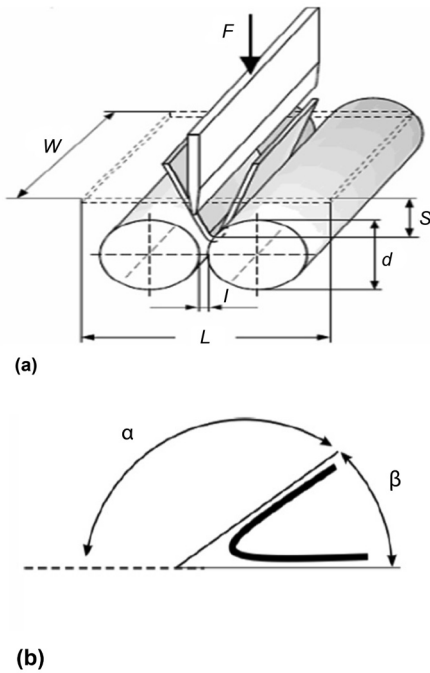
Schematics of (a) an air bending test fixture, used to determine bendability, and (b) the bending angle measurement. Source: Ref 2.15
